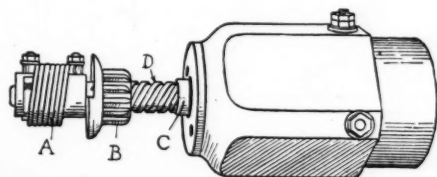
Driving pinion of Bendix starting gear, which should operate freely on the spiral shaft, D
